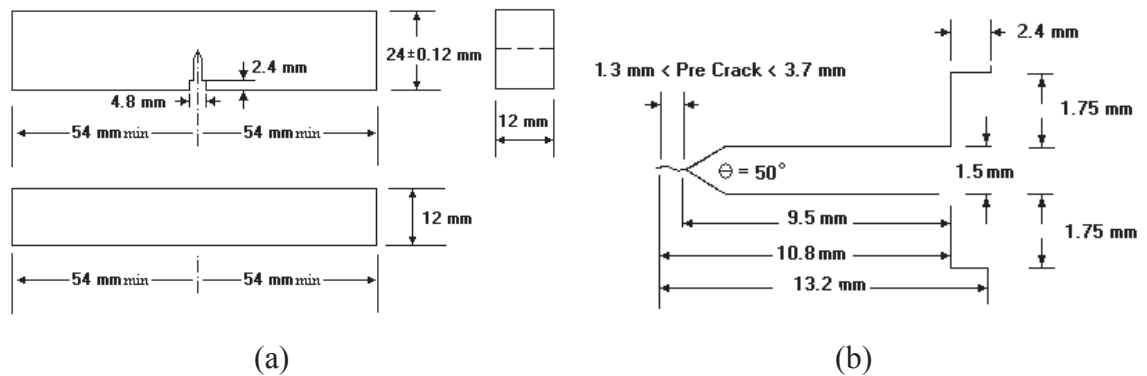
(a) single-edge bend fracture toughness test specimen and (b) straight-through notch.
